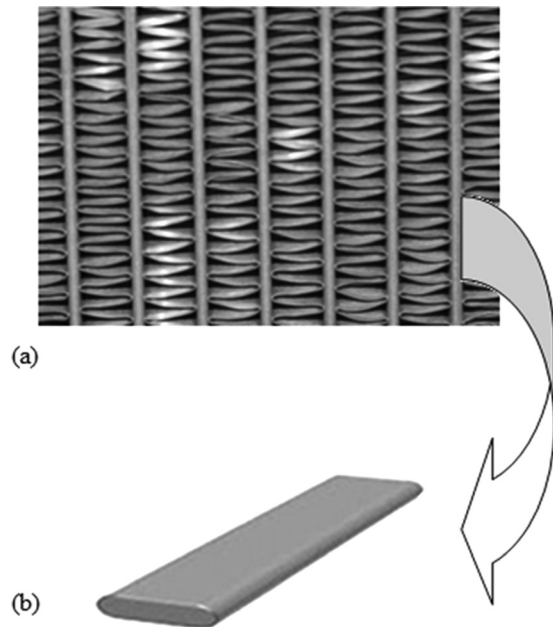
(a) The fin and flat tube of the automobile radiator and (b) stadium-shape of the radiator flat tube
